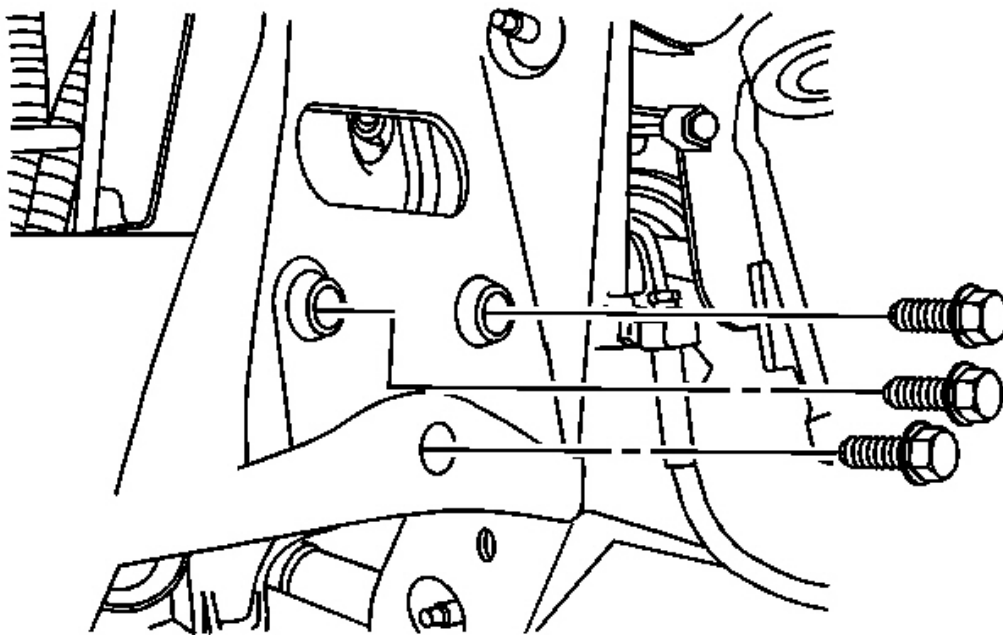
View Of Frame Engine Mount Bracket Bolt Locations
